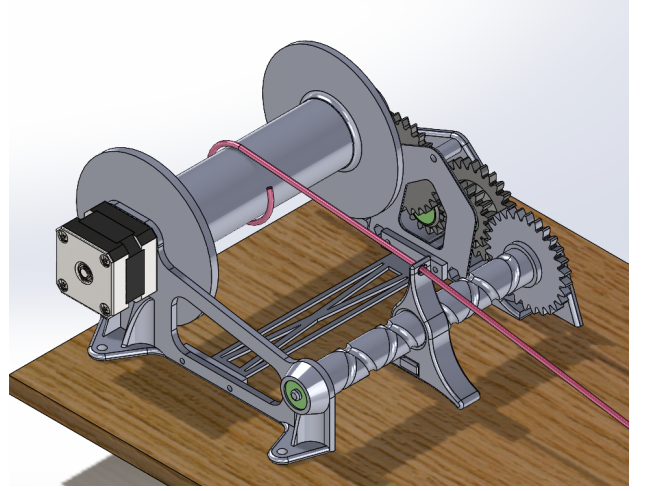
The tether drum assembly featuring a self-reversing leadscrew mechanism for uniform tether winding, driven by a stepper motor through a 7.5:1 gear reduction.
